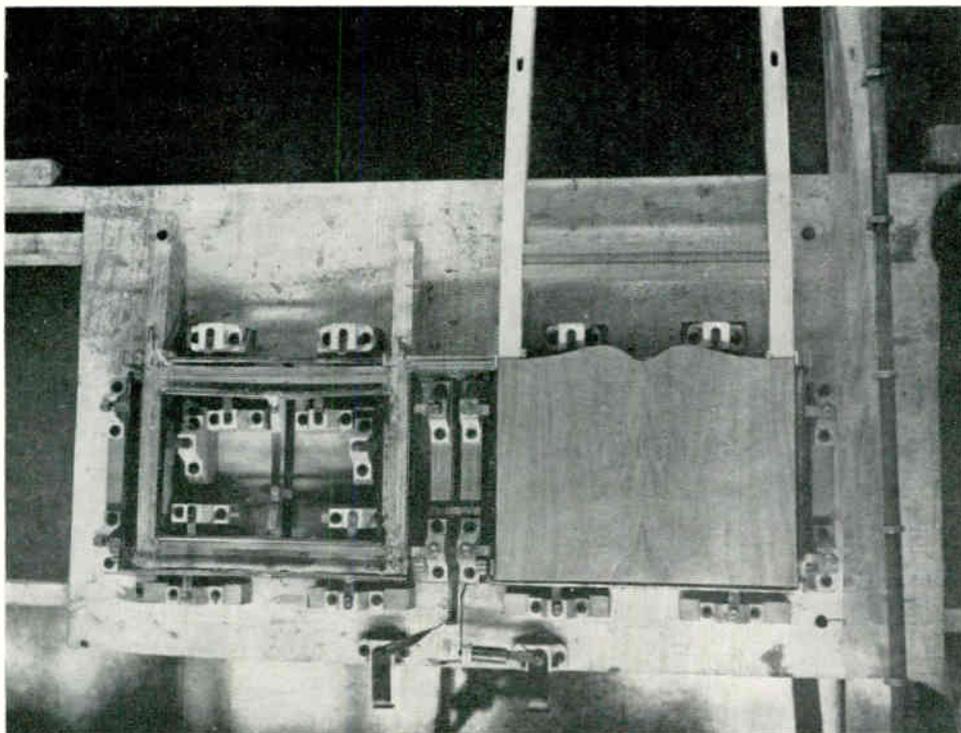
Chair back jig showing electrode arrangement with one side loaded.
